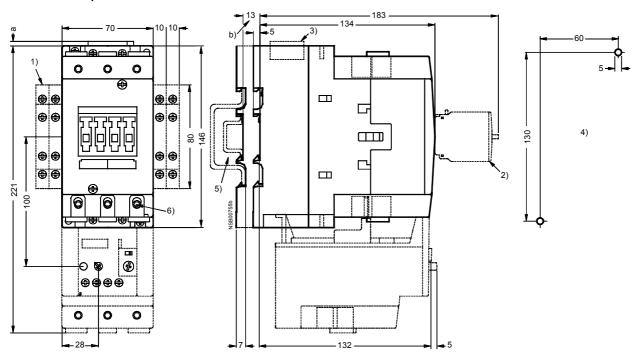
3RT10 4, 3RT14 46 contactors with surge suppressor, auxiliary contact blocks and installed overload relay
